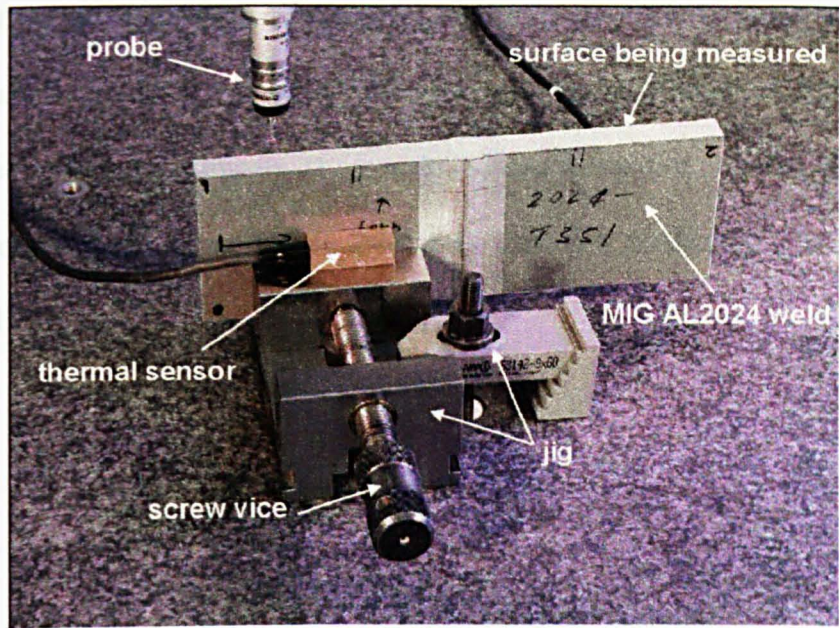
Set-up for CMM contour measurement (MIG 2024-T351 weld)
